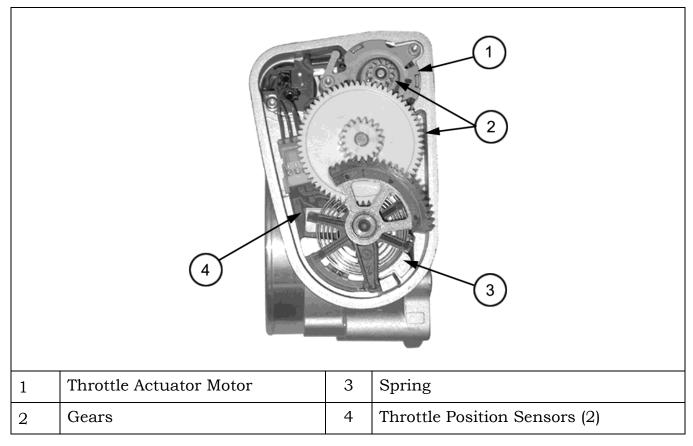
ETC Throttle Actuator Motor, TPS, Spring and Gears
